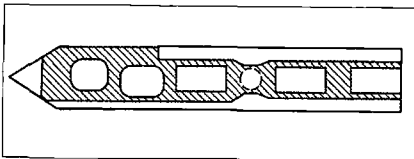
Single-sided printed circuit board layout for the NEC UPC1651 FET probe.
